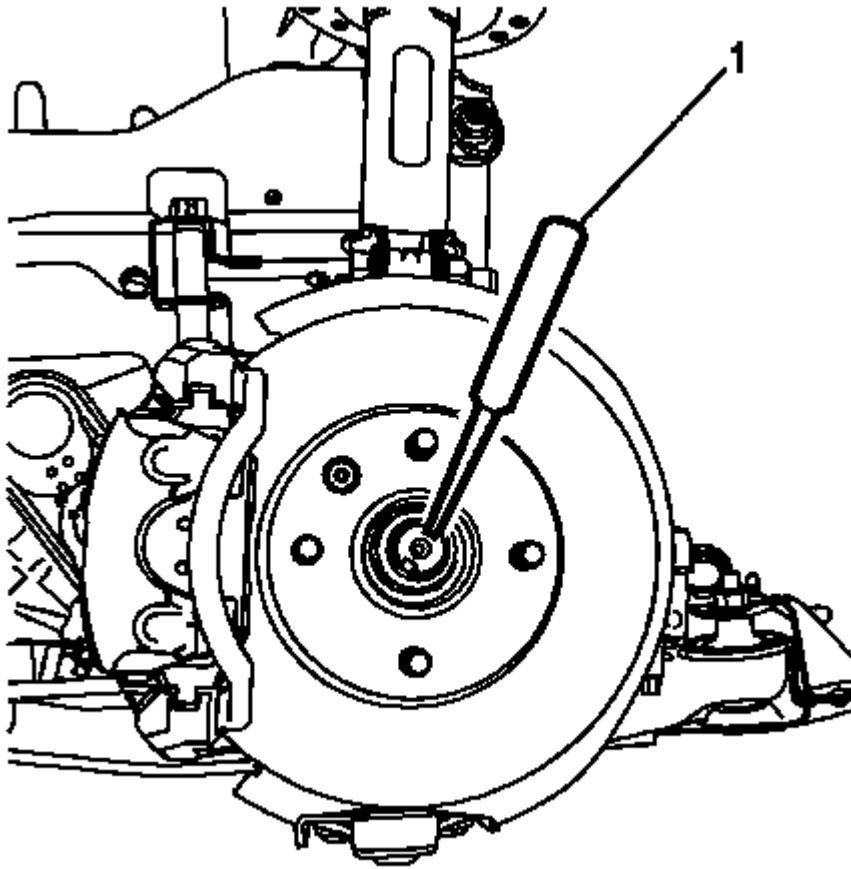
Staking Wheel Drive Shaft Nut With Punch
